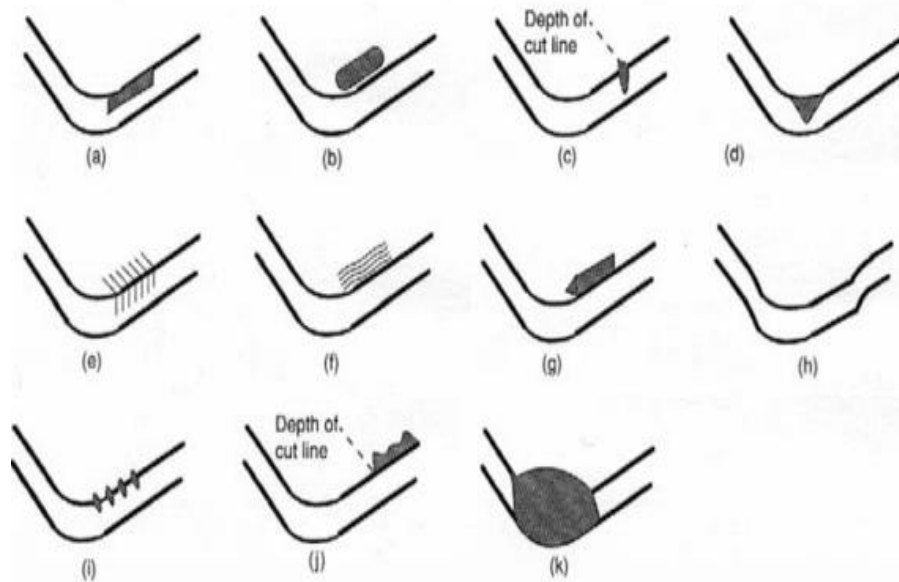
Types of tool wear[12]: (a) Flank Wear, (b) Crater Wear, (c) Notch Wear, (d) Nose Radius Wear, (e) Thermal Cracking, (f) Parallel Cracking, (g) Built-Up-Edge, (h) Gross Plastic Deformation, (i) Edge Chipping, (j) Chip Hammering, (k) Gross Fracture
